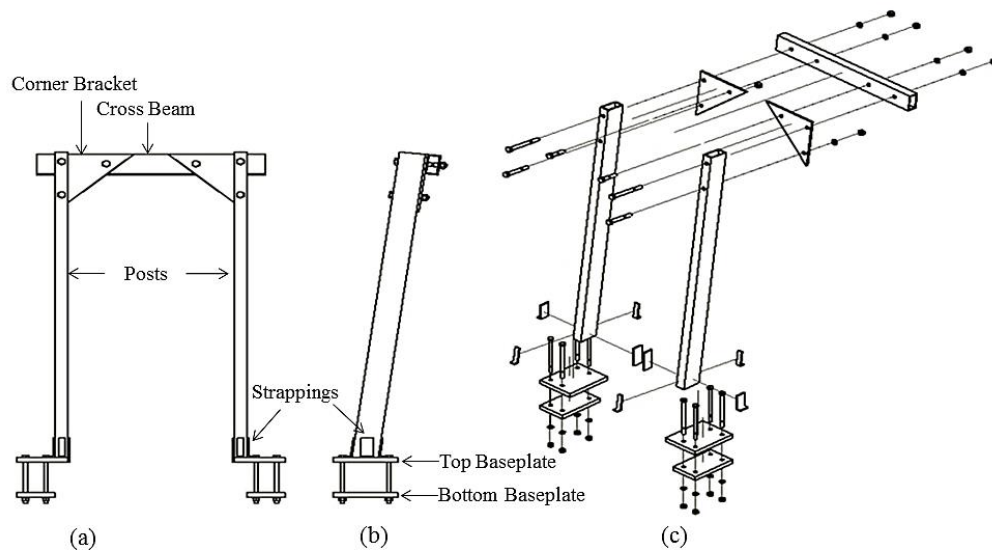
Drawing of the designed ROPS using CRDP (a) Front view. (b) Side view. (c) Exploded view (Ayers et al., 2016).
